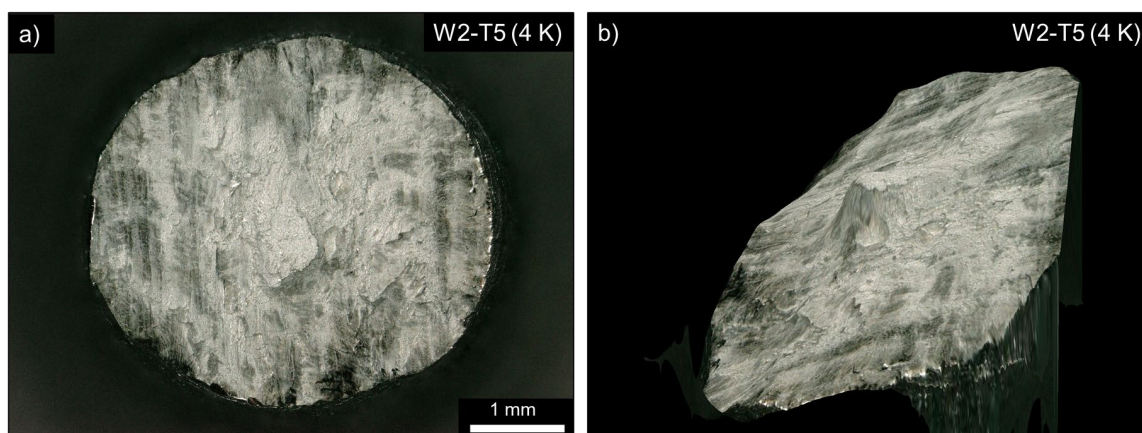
High angle shear fracture morphology in a tensile specimen brought to fracture at 4 K. a) flattened image, b) High angle shear morphology.
